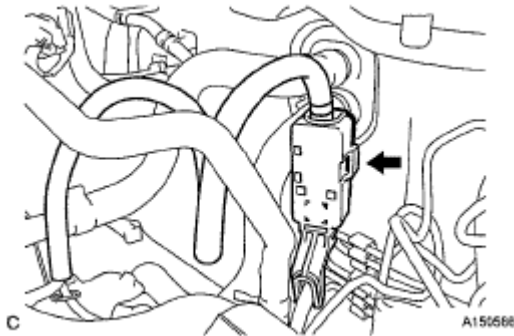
Locating No. 1 Fuel Pipe Clamp
